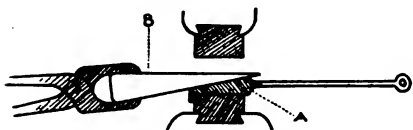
DRAWING OUT WEDGE ON TAPER-TOOL
